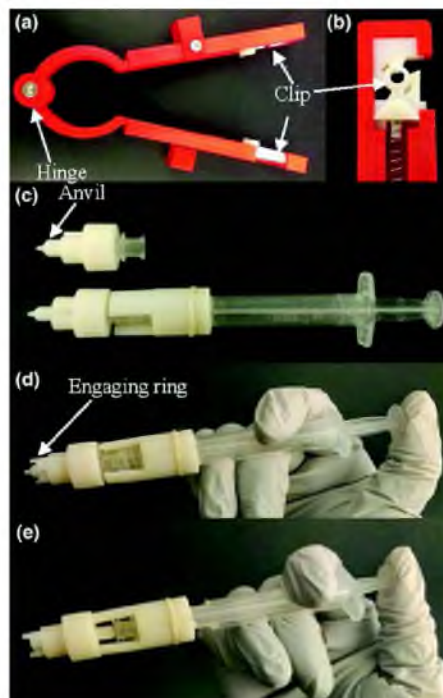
Installation tools: (a) The holder tool; (b) The head of the holder tool, the back ring is secured with clip; (c) The anvil tool with different sizes of anvils; (d) The engaging ring rests on the anvil (before pushing); (e) The engaging ring slides along the anvil (after pushing).
